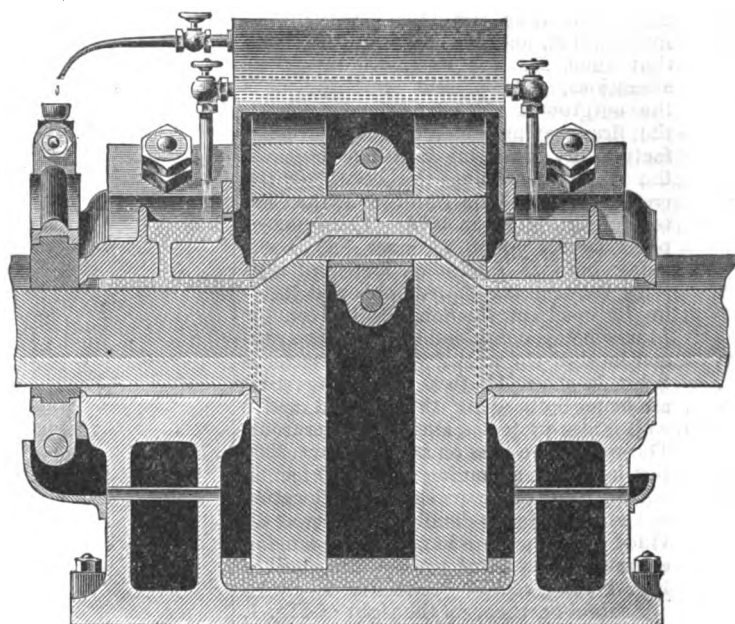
Section through Center of Main Shaft and Crank Pin, Showing Lubricating Devices.
